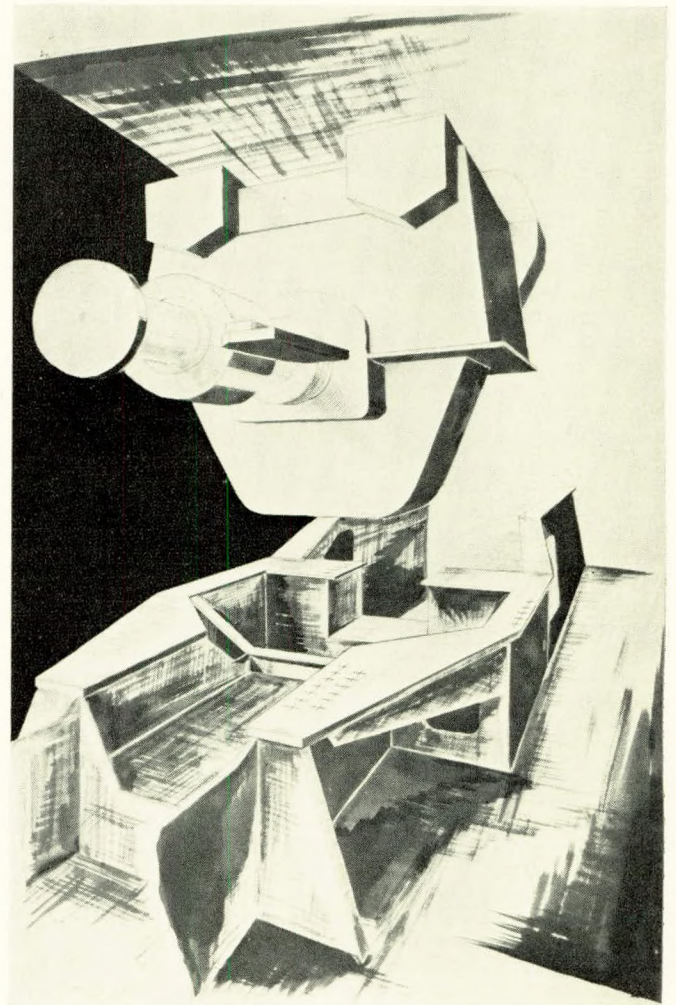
New A.E.I. single-input gear-box and proposed integral main thrust and gear-box seating
